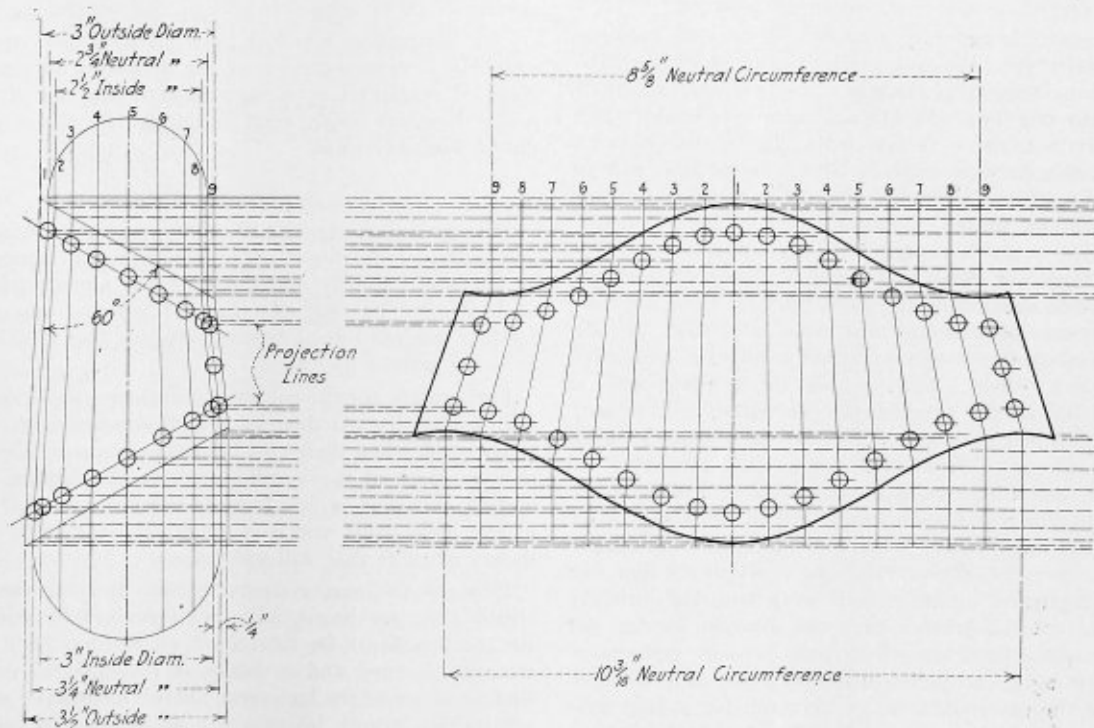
Layout of Two-Piece Elbow with Lap Seams
